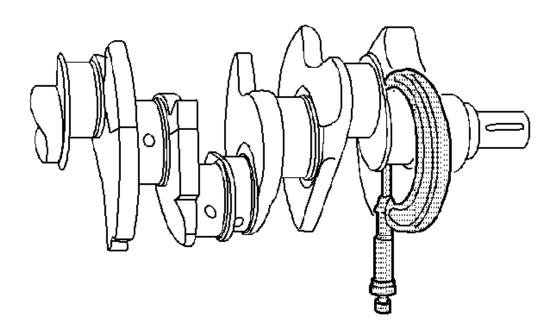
Measuring Crankshaft Bearing Journal Diameter Courtesy of GENERAL MOTORS CORP.
